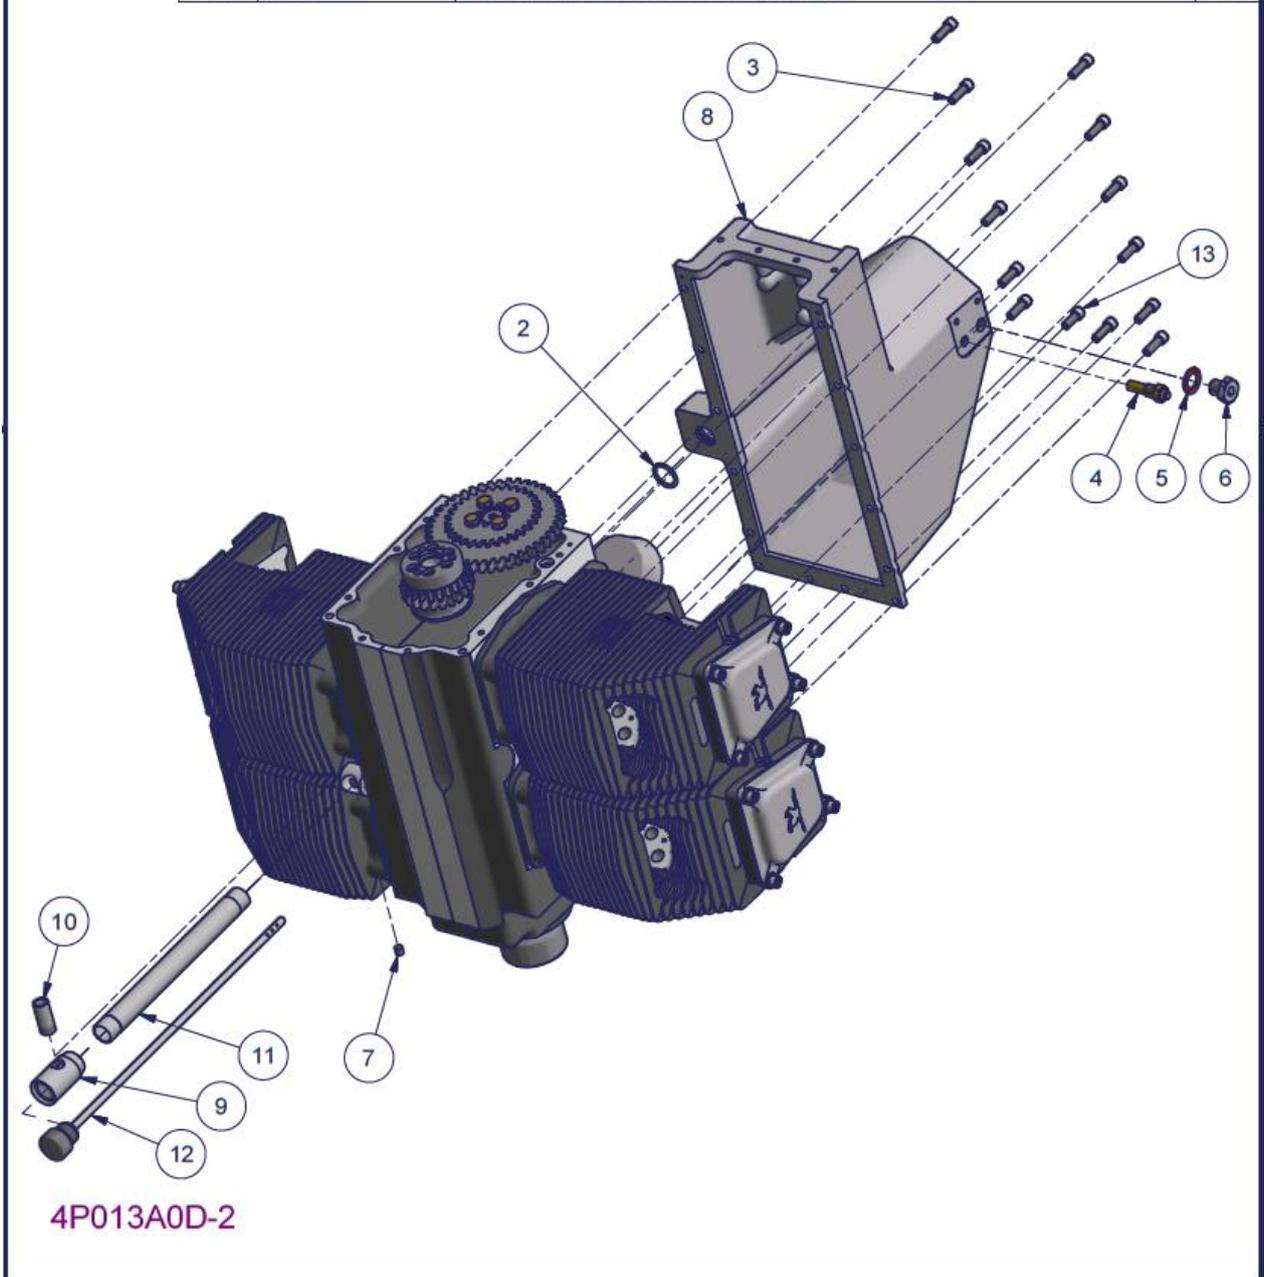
2200 Sump installation (machined plenum) – Parts List
